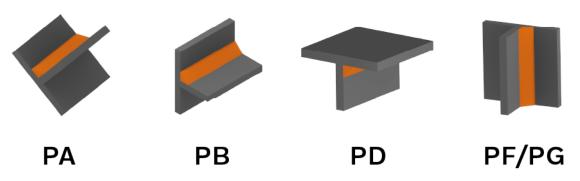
Distinguished welding positions for fillet welds.
